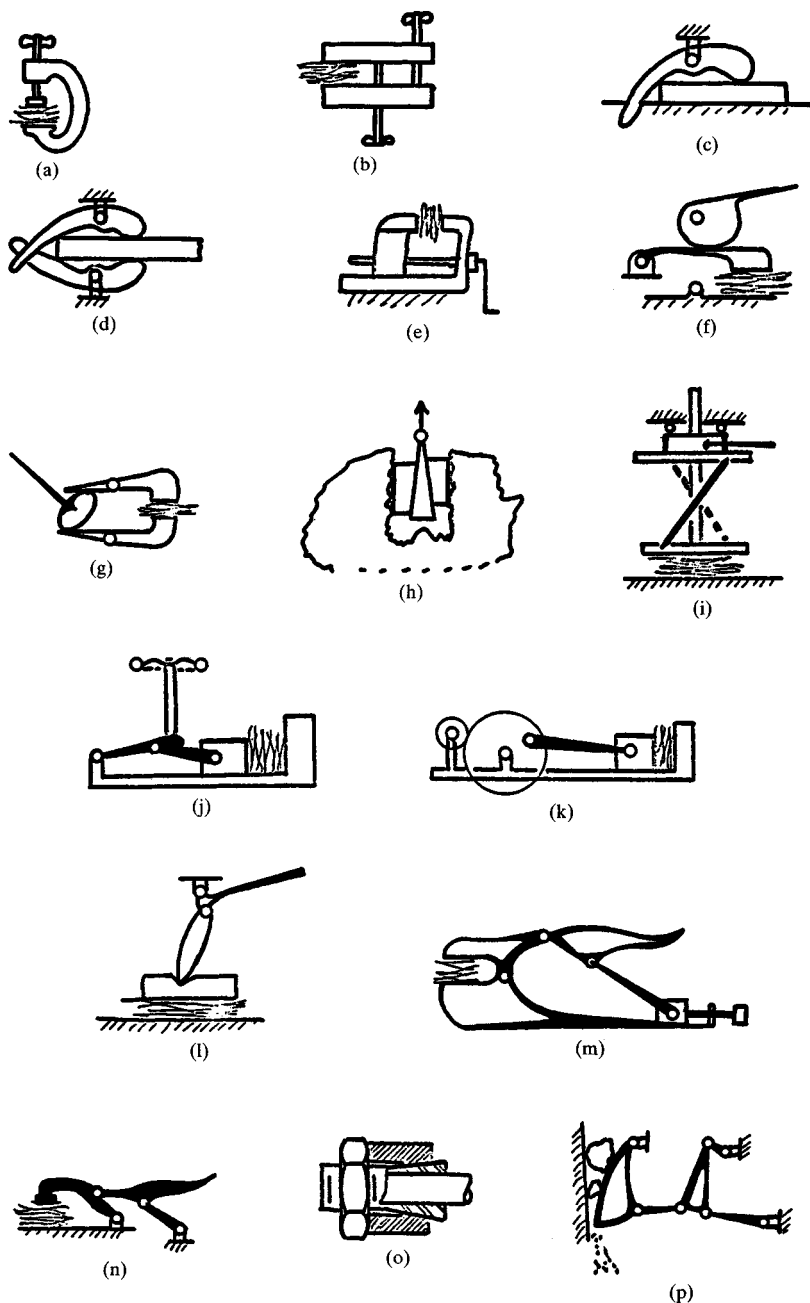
Clamping mechanisms. These devices are used to hold items for machining operations or to exert great forces for embossing or printing. (a) C clamp; (b) screw clamp; (c) cam clamp; (d) double cam clamp; (e) vise; (f) cam-operated clamp; (g) double cam-actuated clamp; (h) double wedge; (i) to (l) toggle press; (m) vise grips; (n) toggle clamp; (o) collet; (p) rock crusher.
